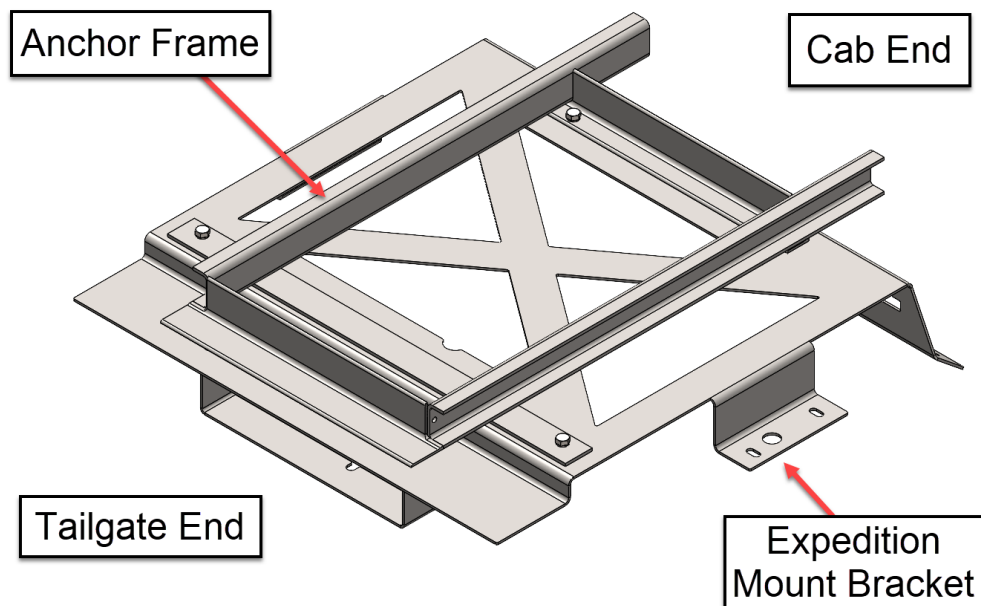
Expedition 2025 and Newer SWB Anchor Frame and Mount Bracket.
